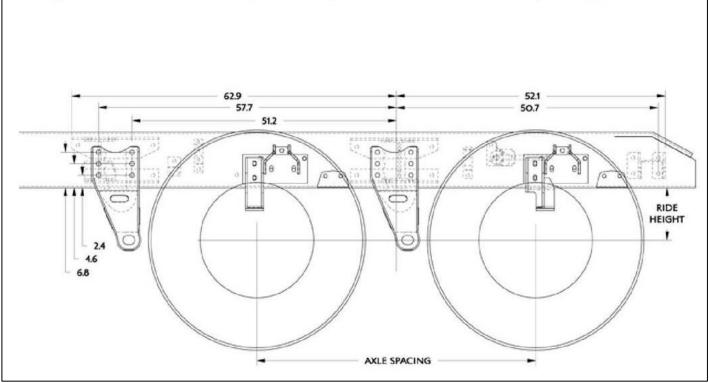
Neway ADZ 252 Frame Drilling (Dimensions In Inches)
